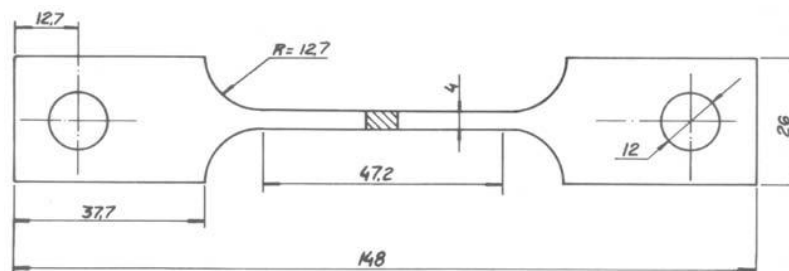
Schematic drawing of the specimen and dimensions of CST Body of Proof.
